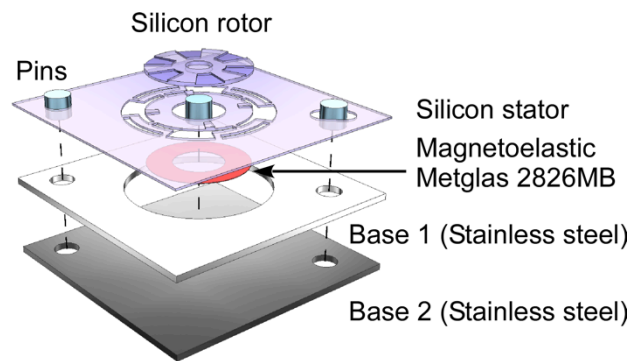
Schematic of Design S geometry. In Design S, the stator is fabricated from a layer of magnetoelastic metal foil bonded to Si.
